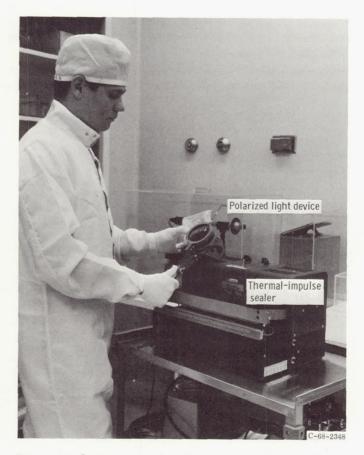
Inspection of seal of clean room packaged part. Typical thermal-impulse sealer is shown.
